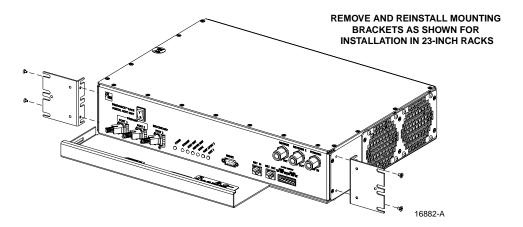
Installing the Mounting Brackets for 23-Inch Rack Installations
